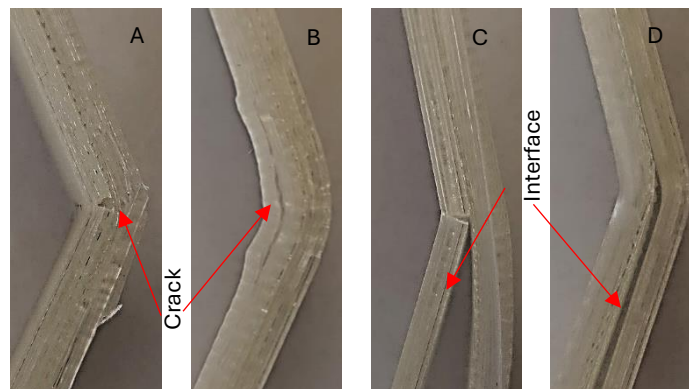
Through-thickness fracture types: (A) condition 1 sample without interface debonding, (B) condition 2 sample without interface debonding, (C) interface fracture on condition 1, and (D) interface fracture on condition 2.
